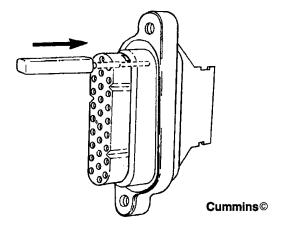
Make Sure Tool is Pushed to Bottom of Cavity
